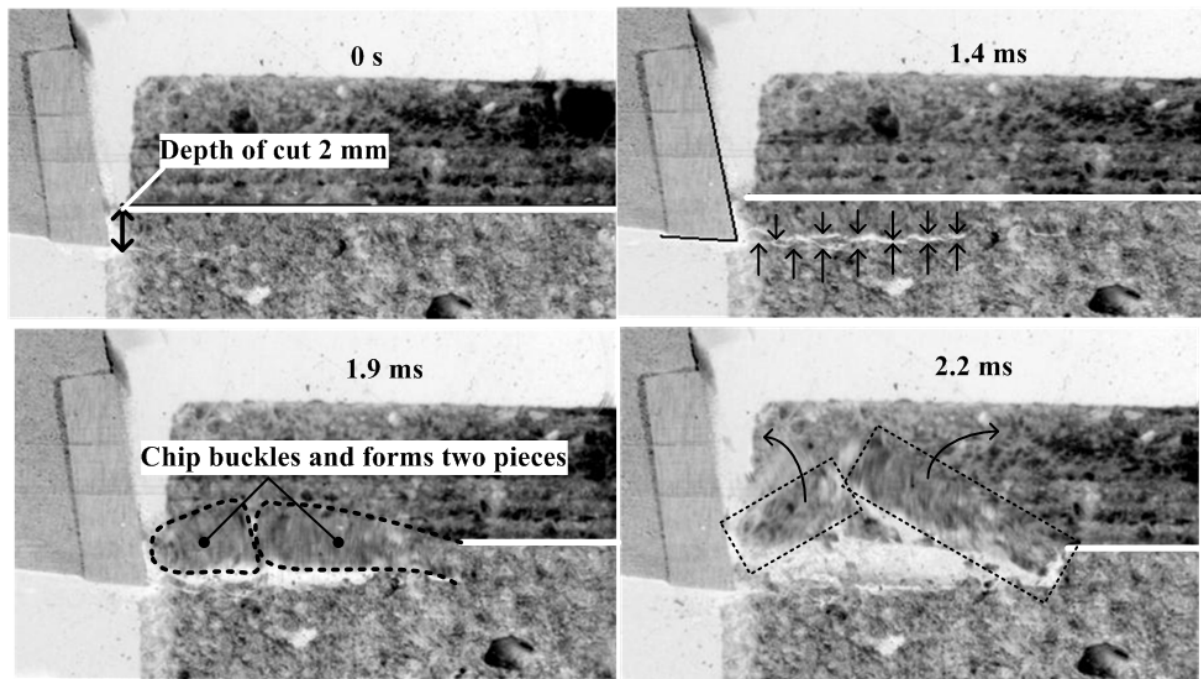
Sequence of images showing the shear failure of a HS workpiece cut with a 10° rake angle at 2 mm depth of cut.
